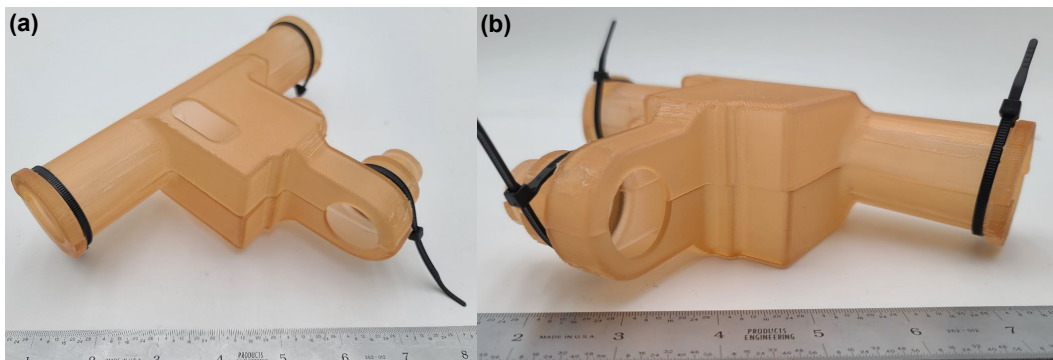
Assembled bus bar cover assembly: (a) top view with Part 1 on top and (b) side view with Part 2 on top.
